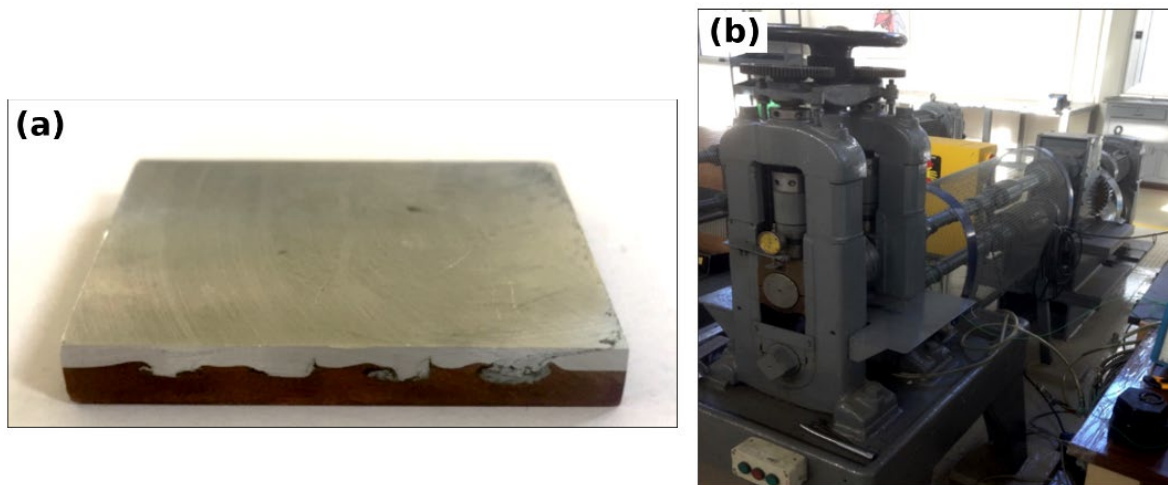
(a) Al–Cu bimetallic sheet after surface preparation by milling, prior to cold rolling, and (b) laboratory rolling mill used for deformation experiments, equipped with integrated force and torque sensors.
